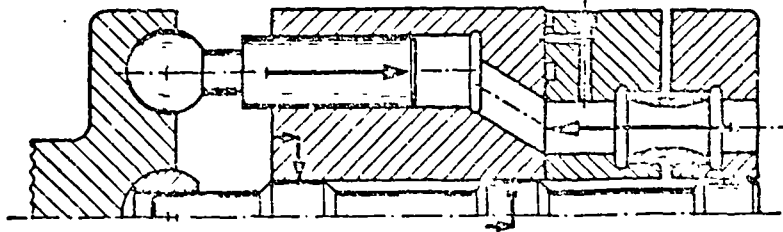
CYLINDER BLOCK RIGIDLY SUSPENDED ON CENTRAL SPINDLE WITH KIDNEY PORTS ON REDUCED PITCH RADIUS AND WITH FLOATING DISTRIBUTOR.
